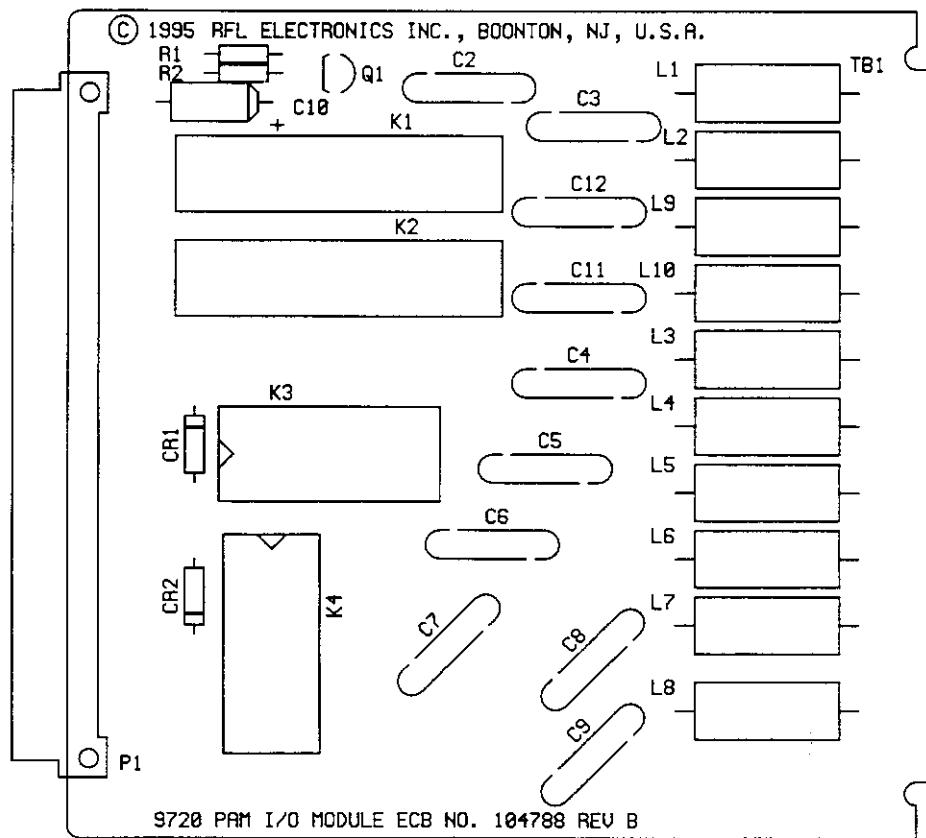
Component locator drawing, RFL 9720 PAM I/O Input/Output Modules
